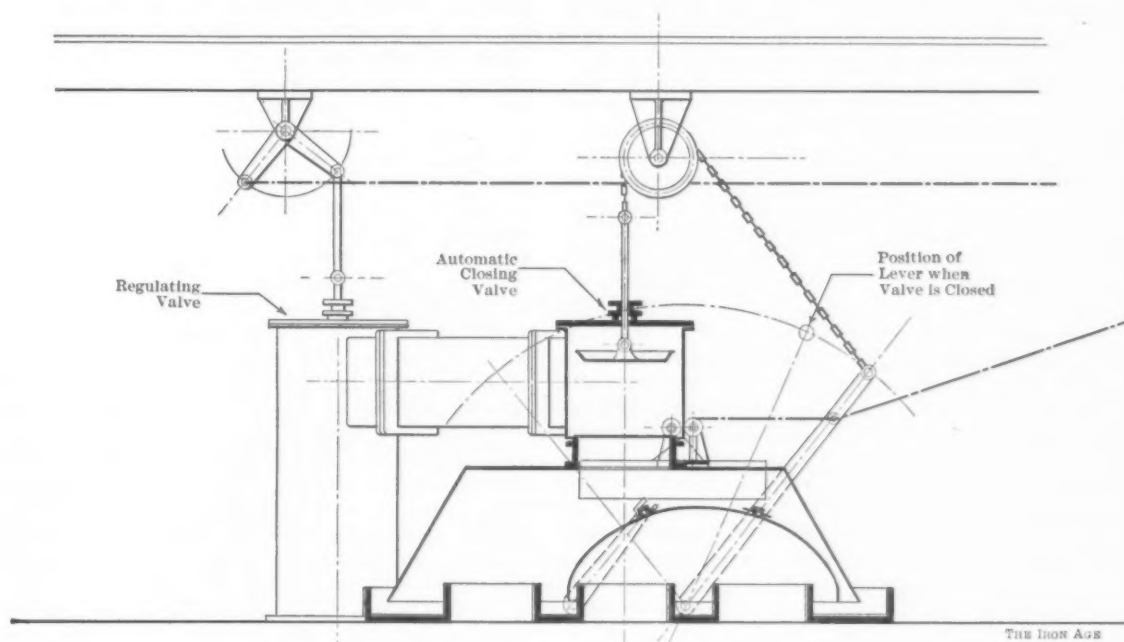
Combination of Gas Cut Off Valve and Forster Valve
